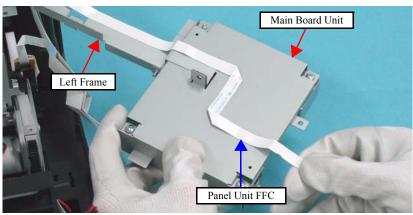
Removing Main Board Unit/Left Frame (3)
